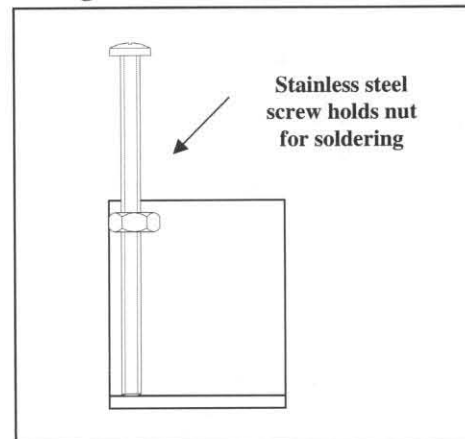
Using a screw as an insertion tool for the nuts. Be sure to use a stainless steel screw so it doesn't get soldered to the nut.
